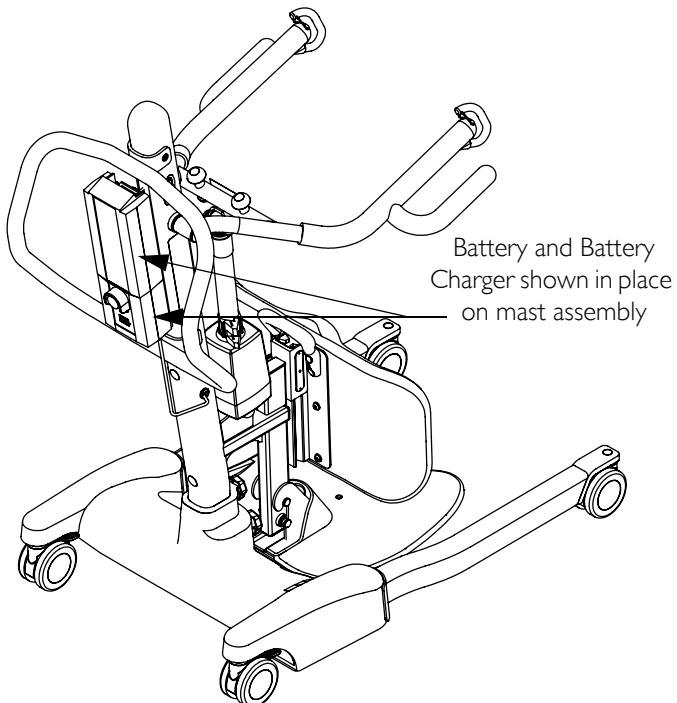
Attaching the Battery Charger to the Mast Assembly
